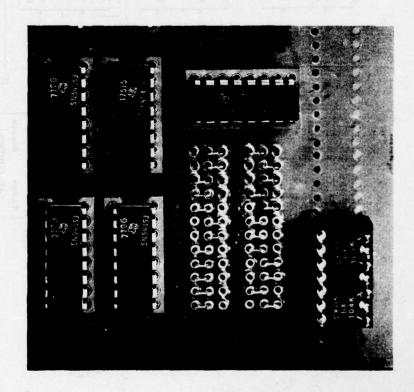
Enlarged section of board "A" showing the provisions for programming.
